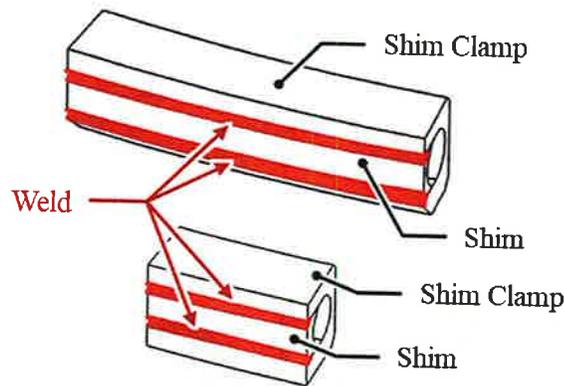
Welds to inspect on the HTT Shim Clamp Weldment Assemblies
